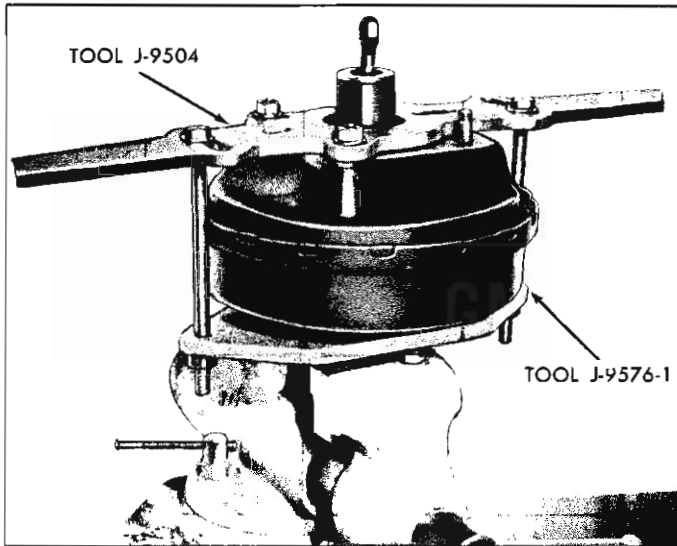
Separating Shells with Tools J-9504 and J-9576-1
